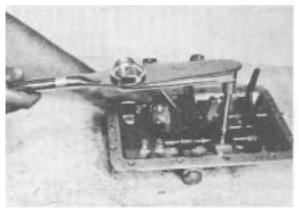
Tighten support capscrews 20 to 25 ft. lbs. torque [27,2-33,8 N.m].
